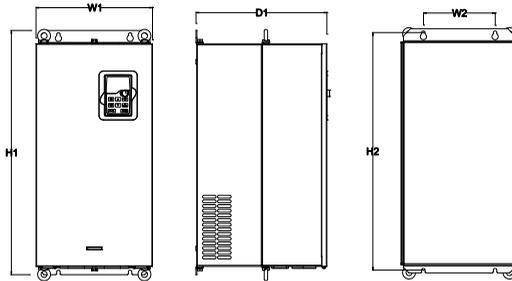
Wall-mounting diagram of servo drives of 380 V, 37 to 110 kW
